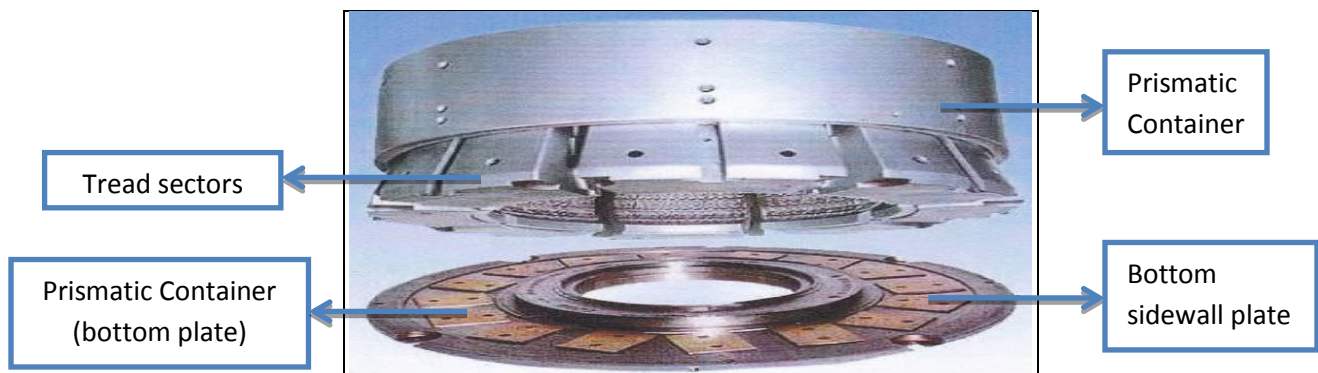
Assembled tyre compression mould with prismatic container (Tompkins, 1981).
